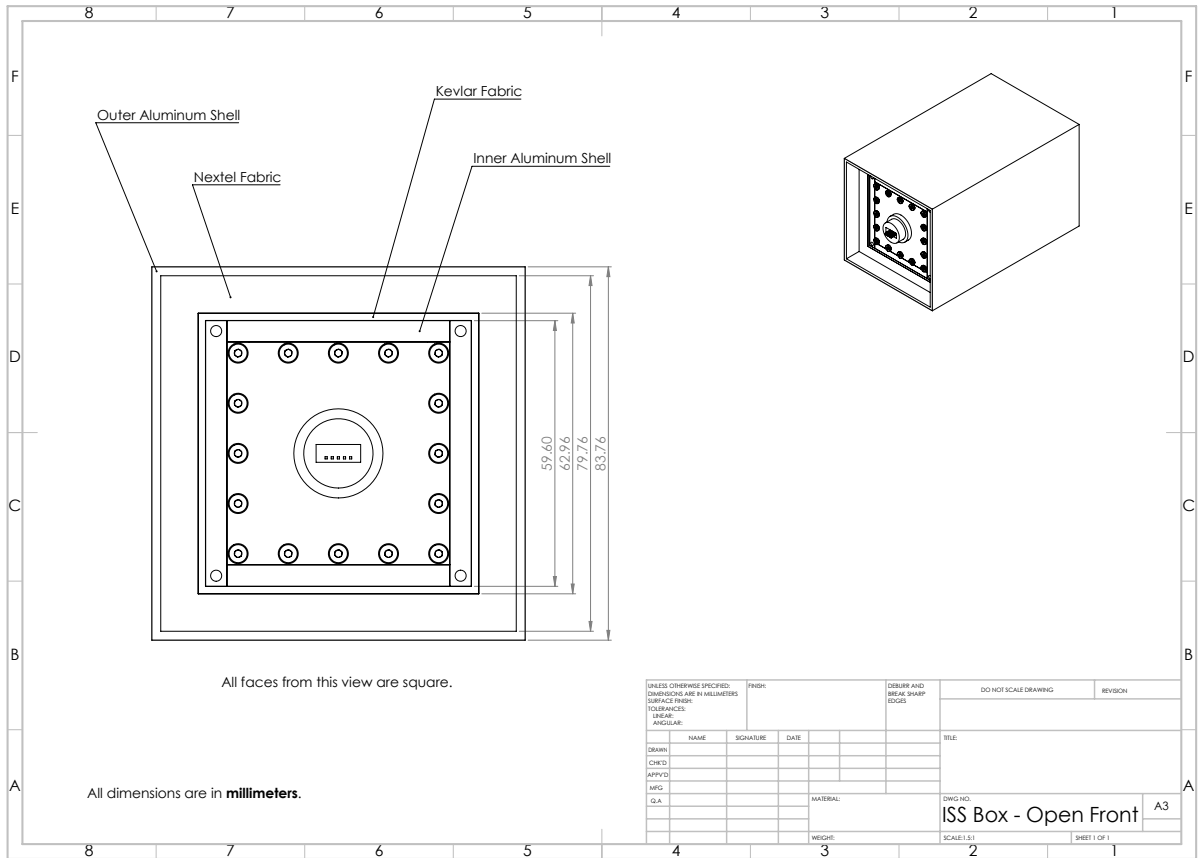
A detailed front view of MISS with the front plate removed.
